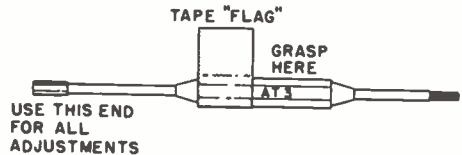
Attaching a tape "flag" to the alignment tool.
